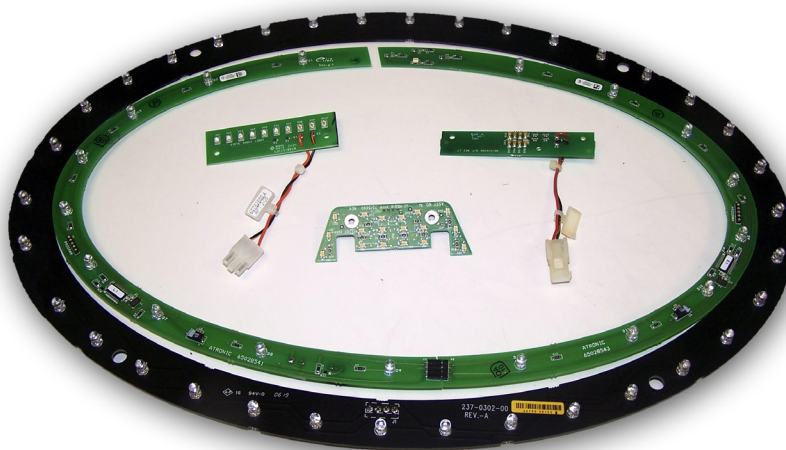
Various LED light assemblies: Two topper LED rings from Aristocrat and Atronic toppers, IGT printer and bill acceptor bezel LED assemblies and an IGT trimline bill acceptor assembly (the odd shaped one).
